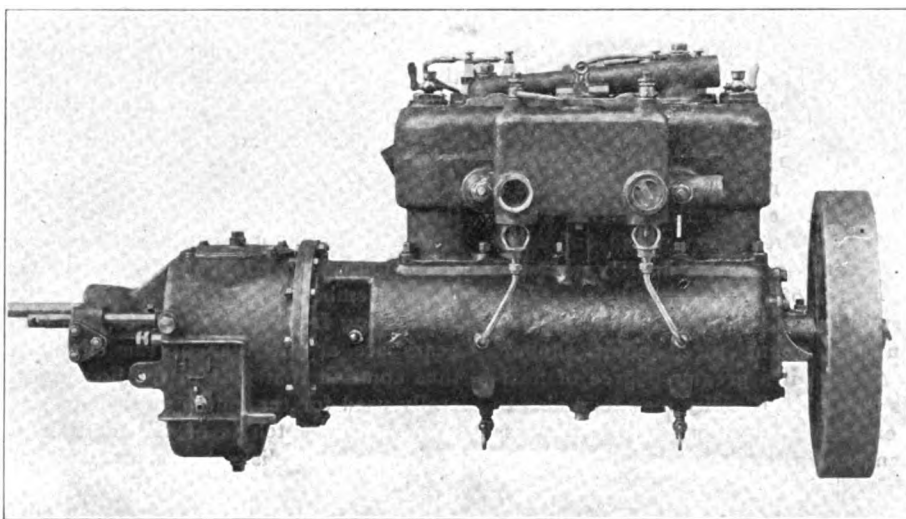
SHOWING FLYWHEEL IN FRONT—HUPMOBILE CONSTRUCTION
